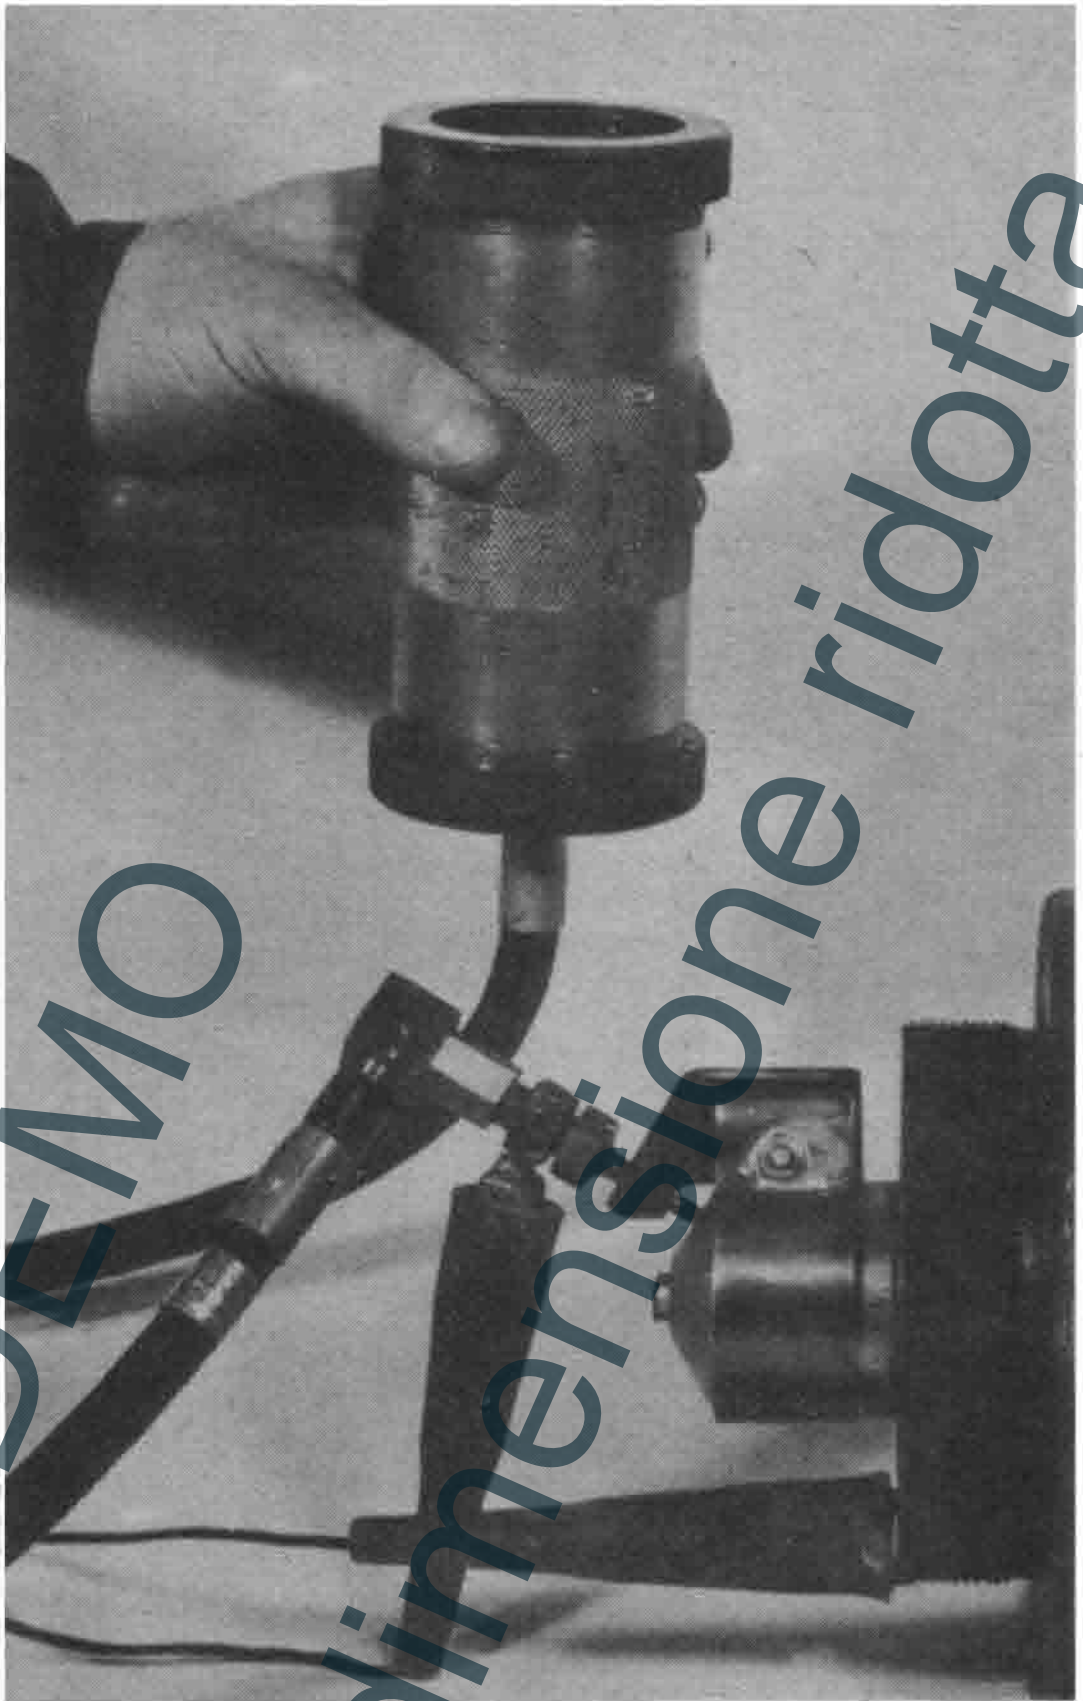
REVERSE PLATING WITH CLAMP AND ELECTRODE
